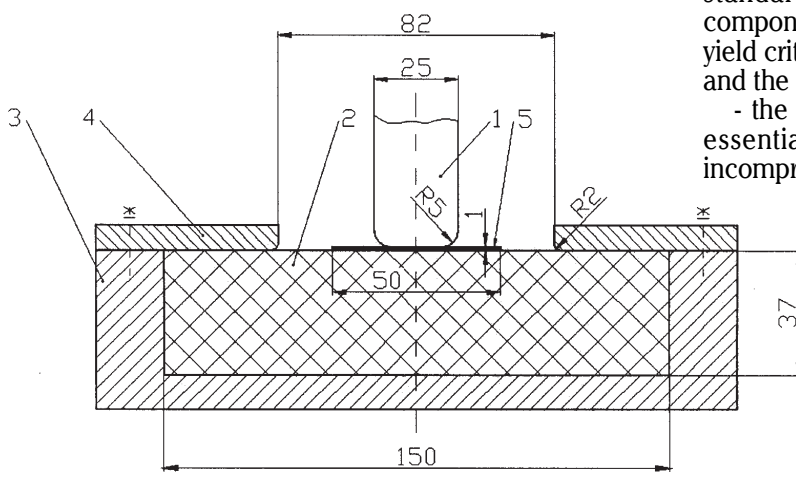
Dimensions of the tools and metallic blank used in the simulation of the bending process (1 – punch, 2 – deformable pad, 3 – container, 4 – retaining plate, 5 – blank)
